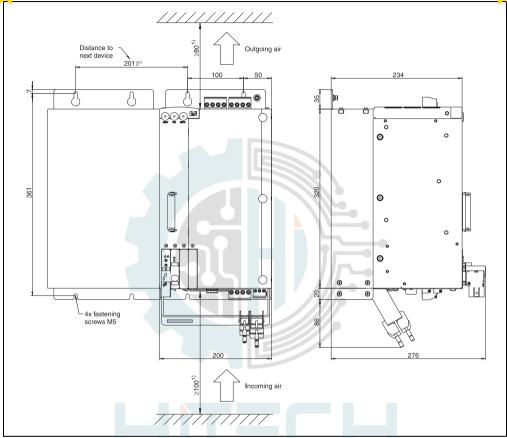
Dimensional diagram and installation dimensions for ACOPOS 1180, 1320
